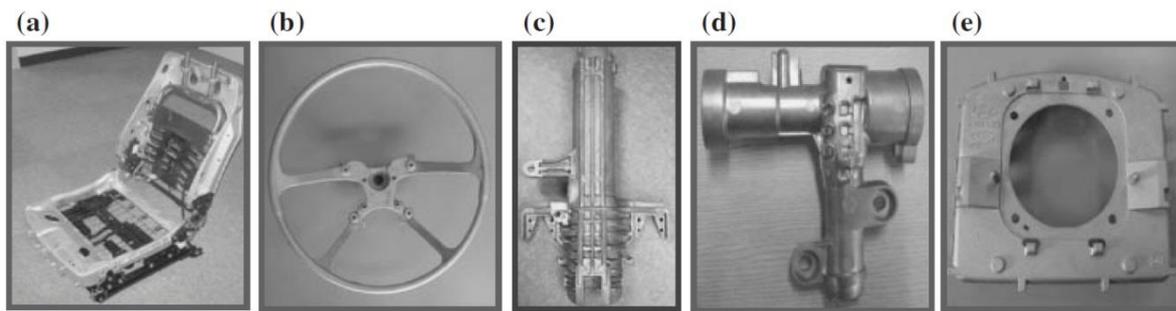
Magnesium interior parts in Hyundai and Kia motors corporation: (a) seat frame, (b) steering wheel core, (c) steering column housing, (d) lock body and (e) driver air-bag housing. Reprinted from [144]
